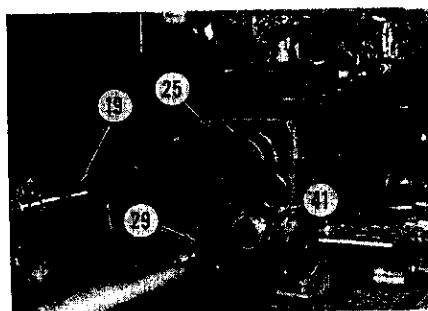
Transmission assembly shown separated from clutch housing. Tractor shown is a B-275 dual plate clutch model, however, B-414, 424, 444, 2424, 2444, 354, 364 and 384 series tractors are similar. Single plate clutch models will not have front pto shaft (29) and will have a cover type retainer instead of retainer (41) shown.
